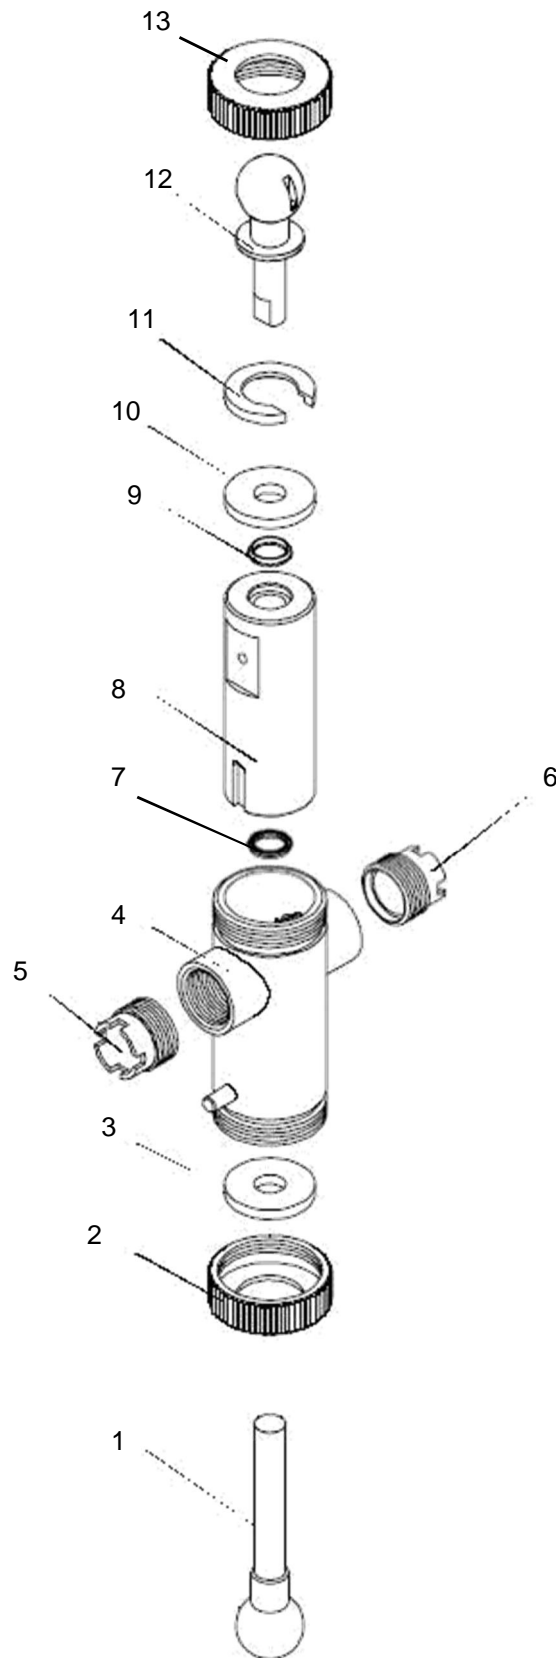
LF Multiplex Pump Module Component Assembly/Disassembly
